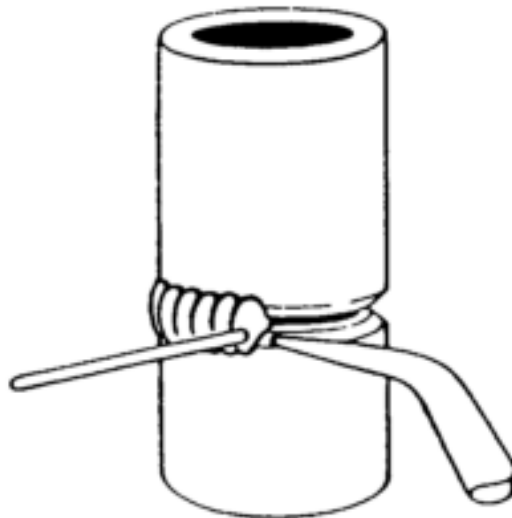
Vertical pipe fixed position weld with backhand method.
